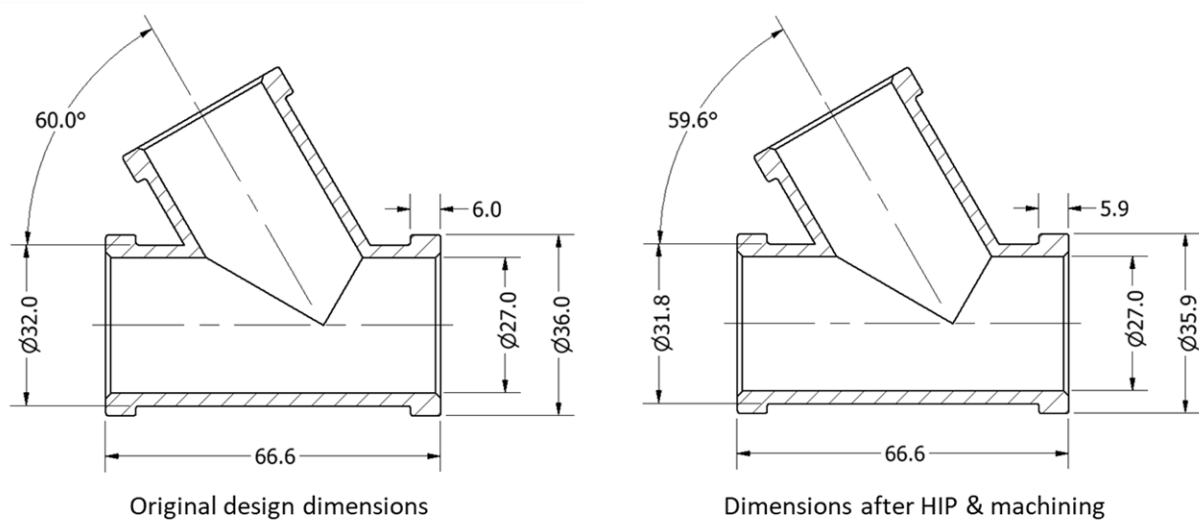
CMM dimensional assessment of the HIPed + machined Y-shaped submarine pipe.
